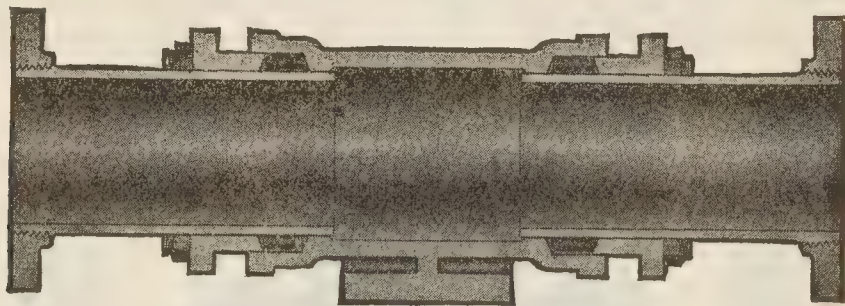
,932.—Crane double expansion joint with anchorage saddle base for 125 lbs. working pressure.
